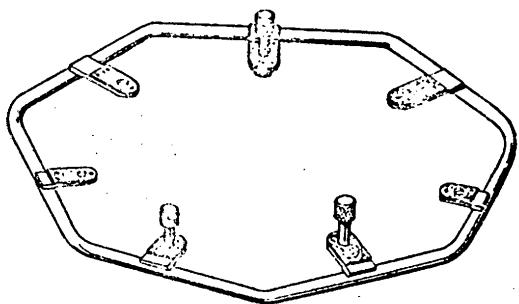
TOOLS AND APPLIANCES FOR CRANKCASE ASSEMBLY
